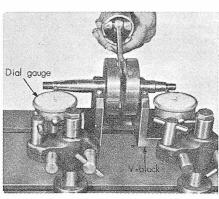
Method of measuring crankshaft run-out (eccentricity) using "V" blocks and dial indicators is shown above.
